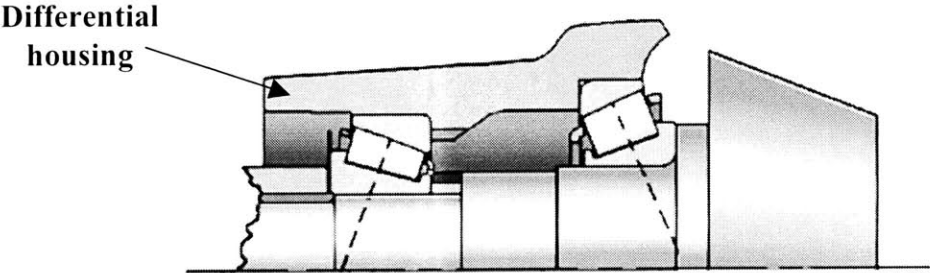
Pinion shaft and bearings (Courtesy of The Timken Company)
